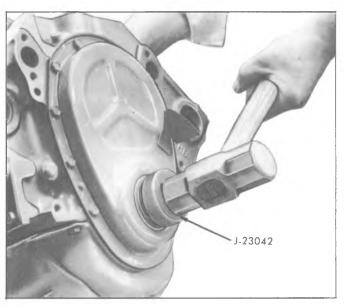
A-35--Installing Oil Seal (Cover Installed)
